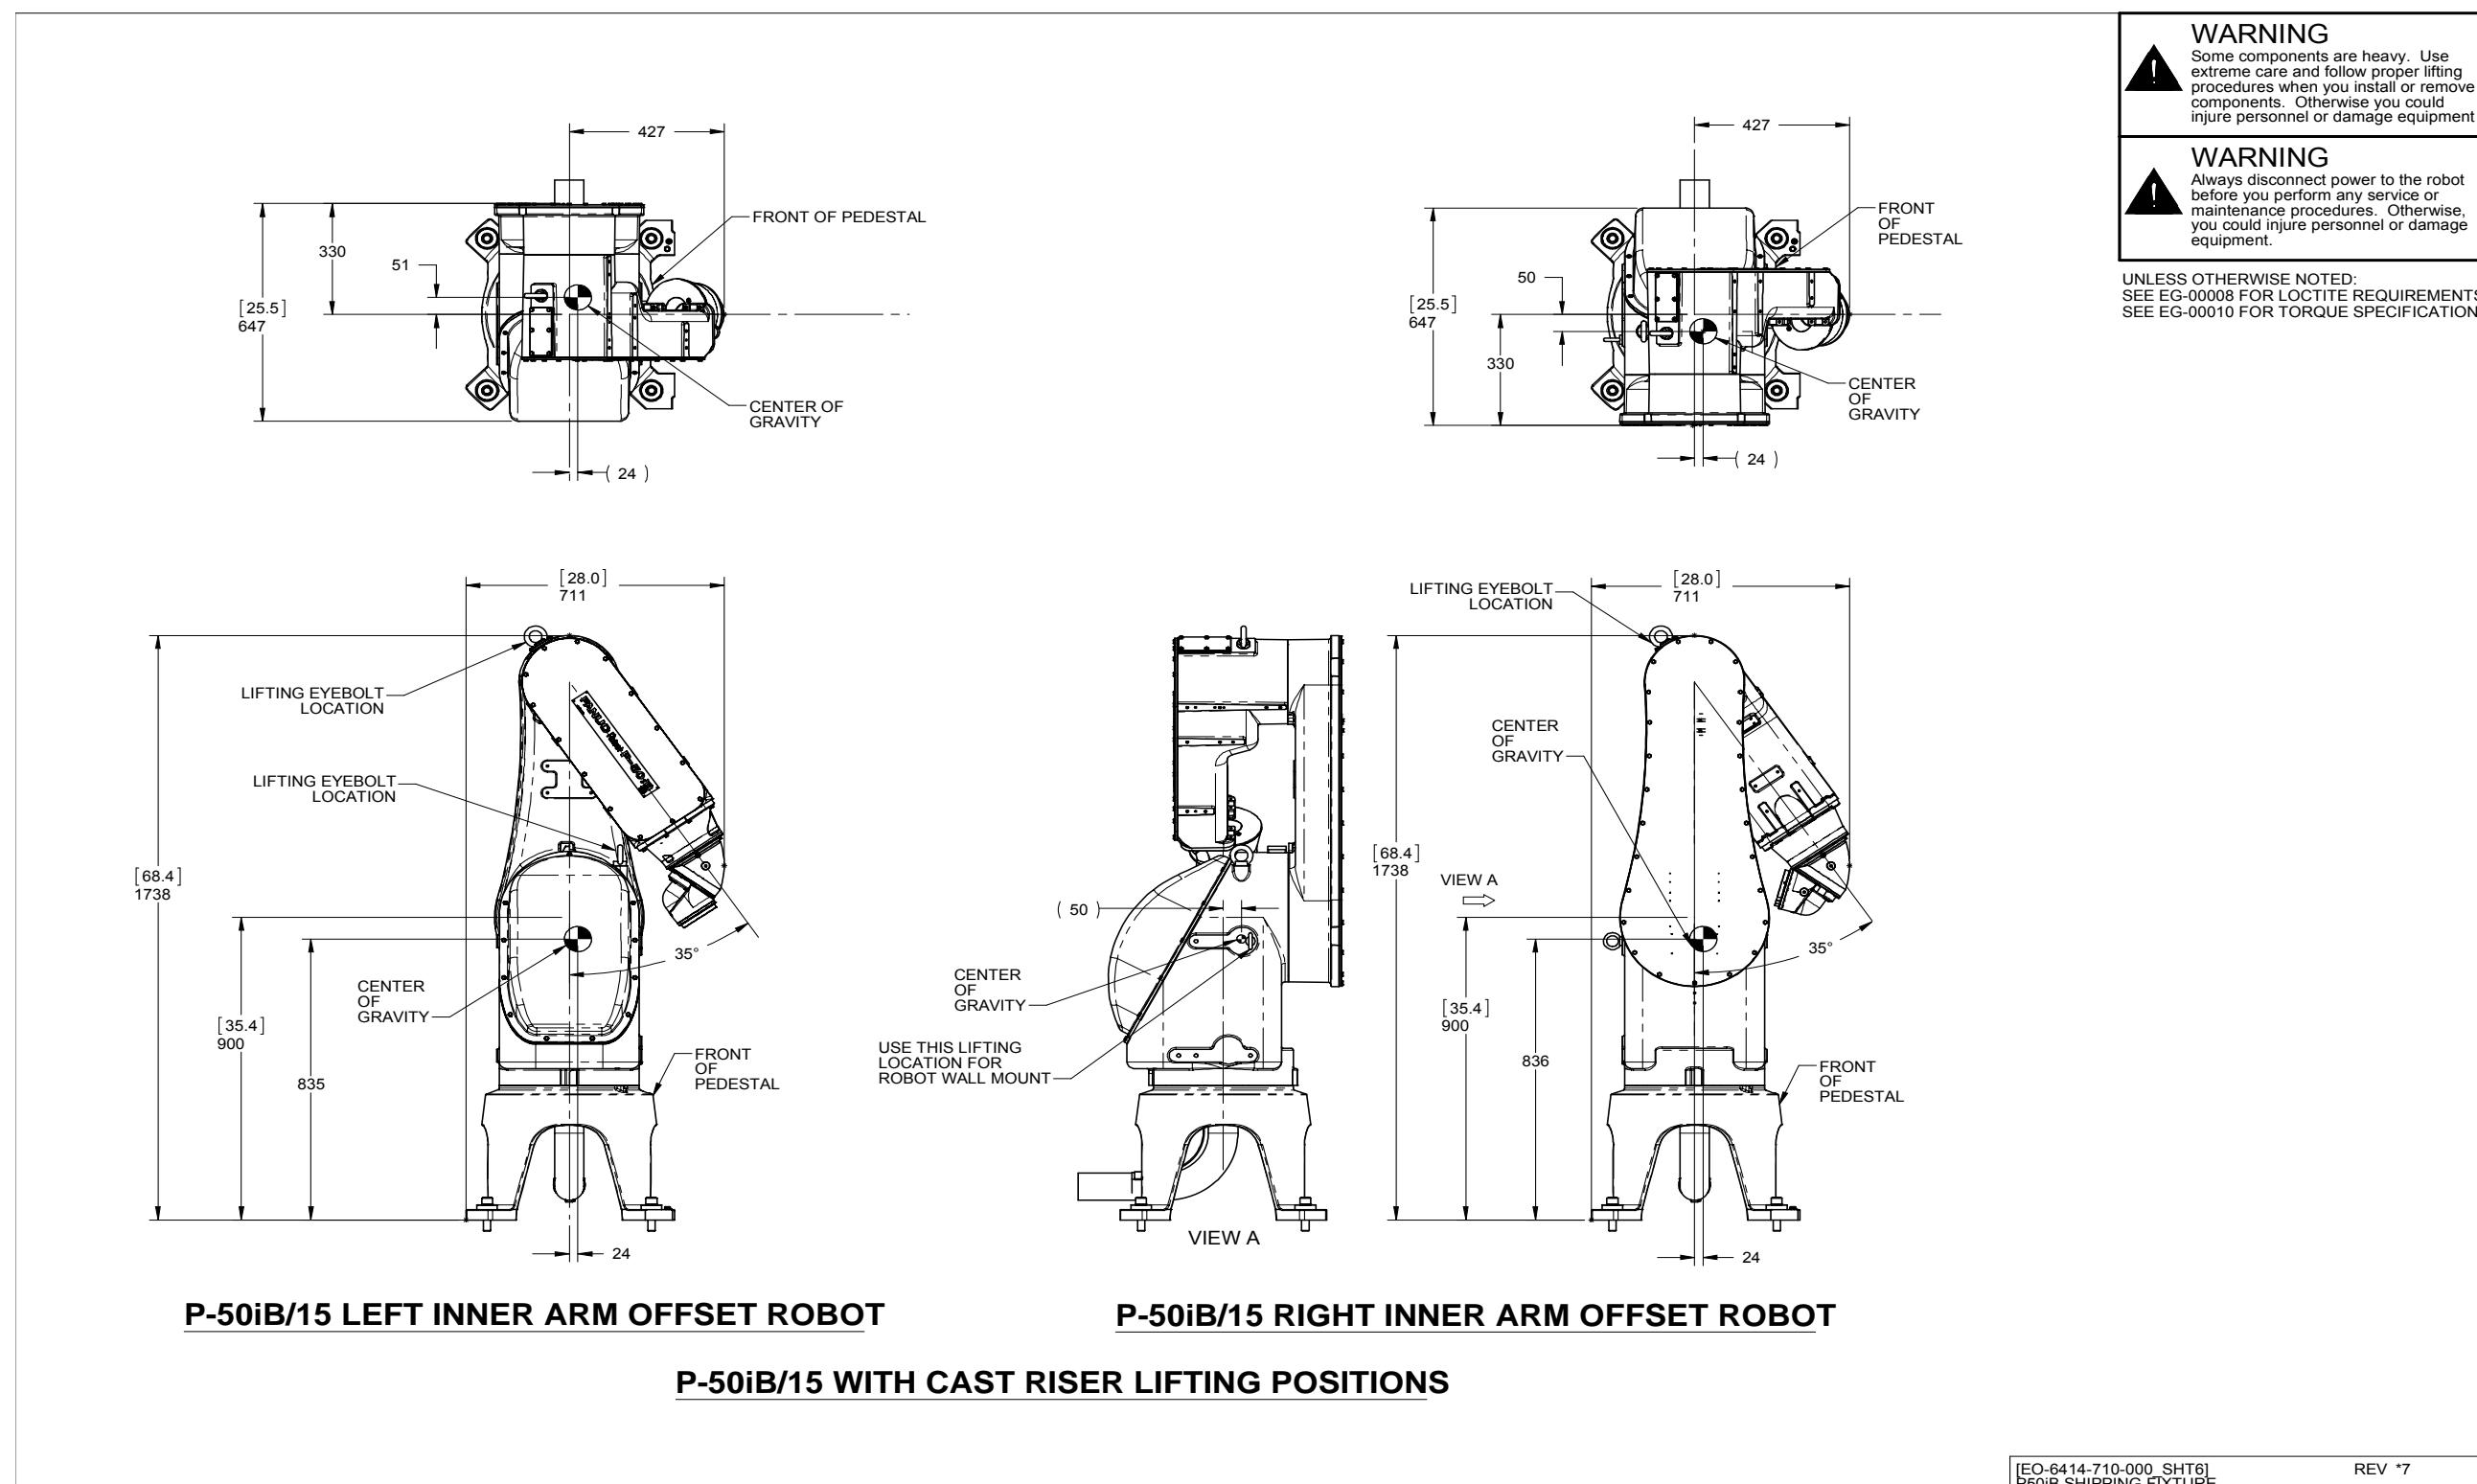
EO-6414-710-000 SHT6, P50iB SHIPPING FIXTURE
